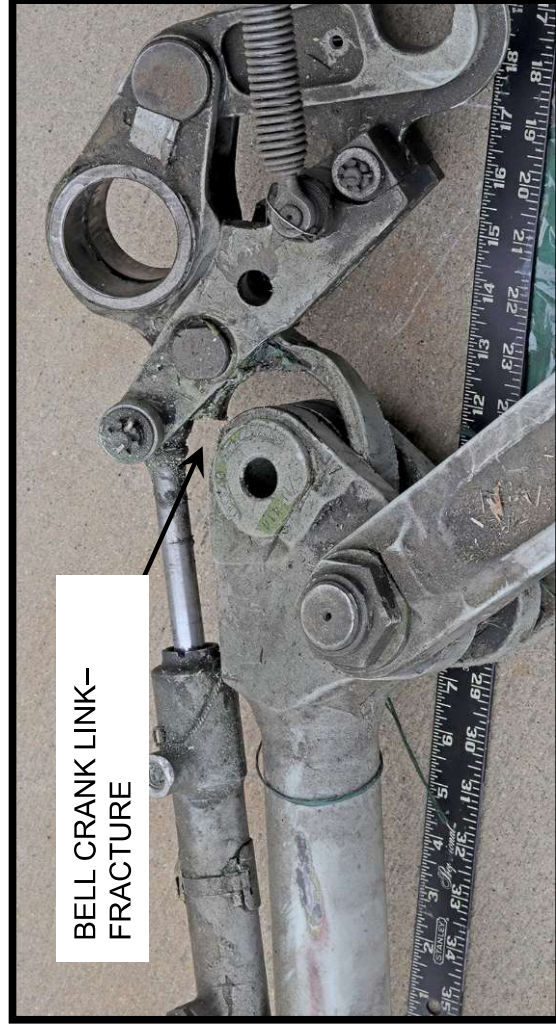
Detailed view of R/H MLG- Side Strut/Bell Crank Link Fracture.
